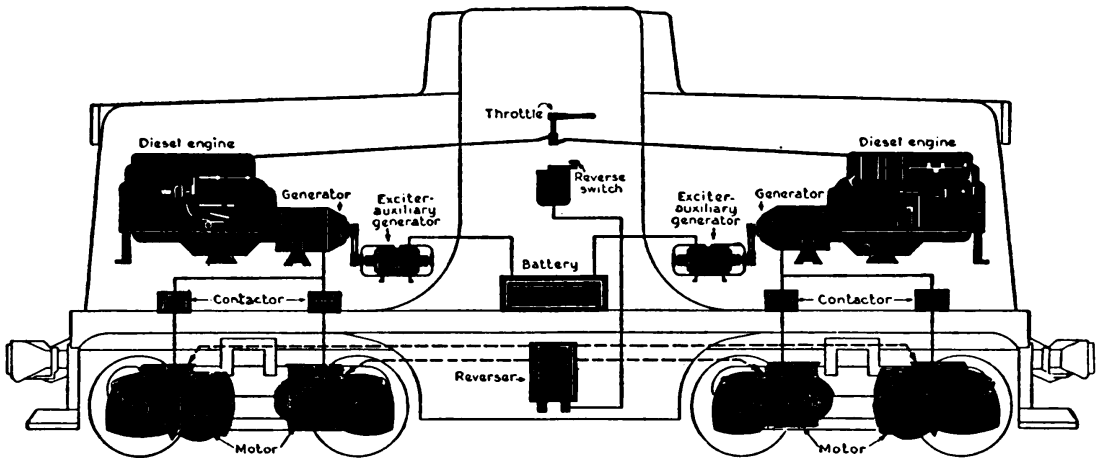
Phantom View of Diesel Engine and Electrical Equipment
